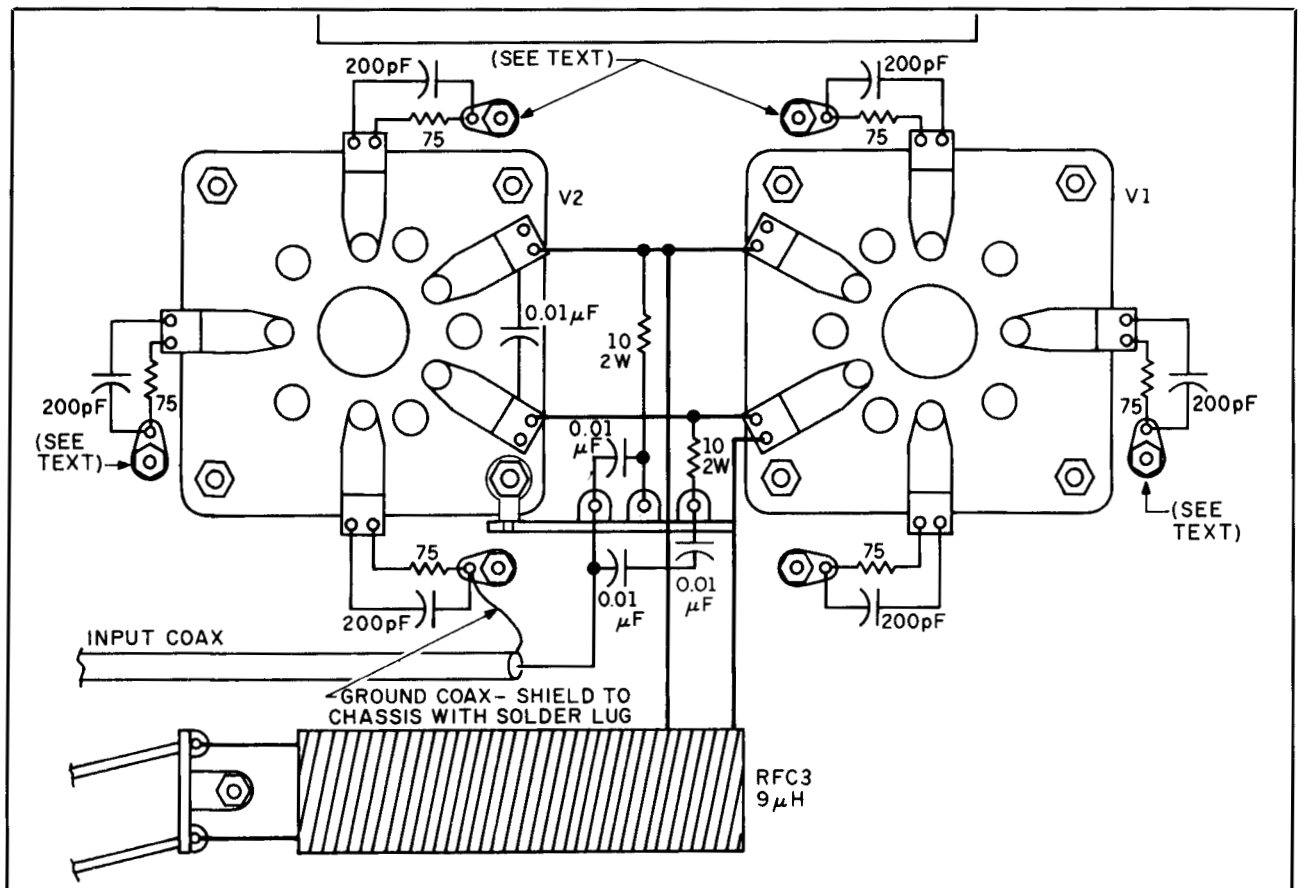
Detail of revised mechanical and electrical connections to grids of V1 and V2. Note grounding of shielded braid of input coaxial line to solder lugs and new mounting locations on chassis.
